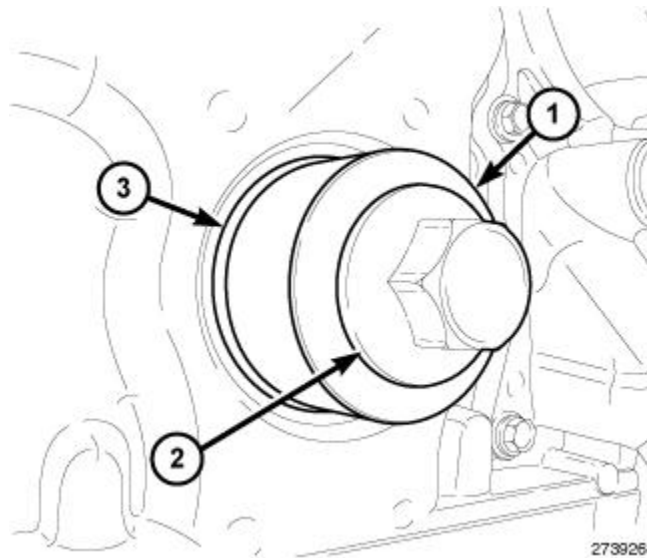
Front Crankshaft Seal Installer & Oil Seal
